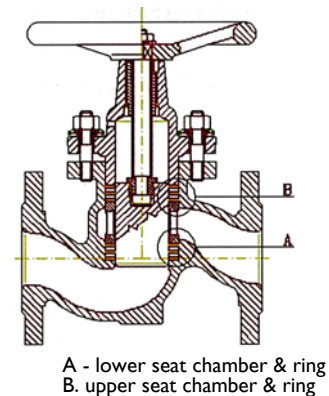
Cross-section of a piston valve, unbalanced piston design
